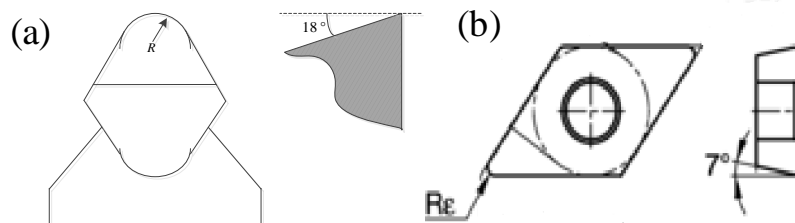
Tool geometry (a) diamond tool (b) tungsten carbide tool
